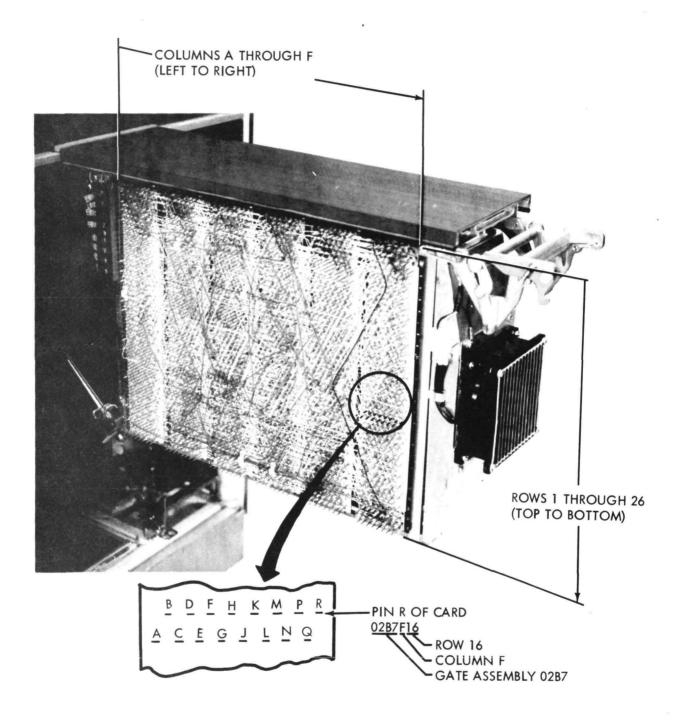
SMS Card Location and Pin Arrangement in Gate Assemblies V-8-2
